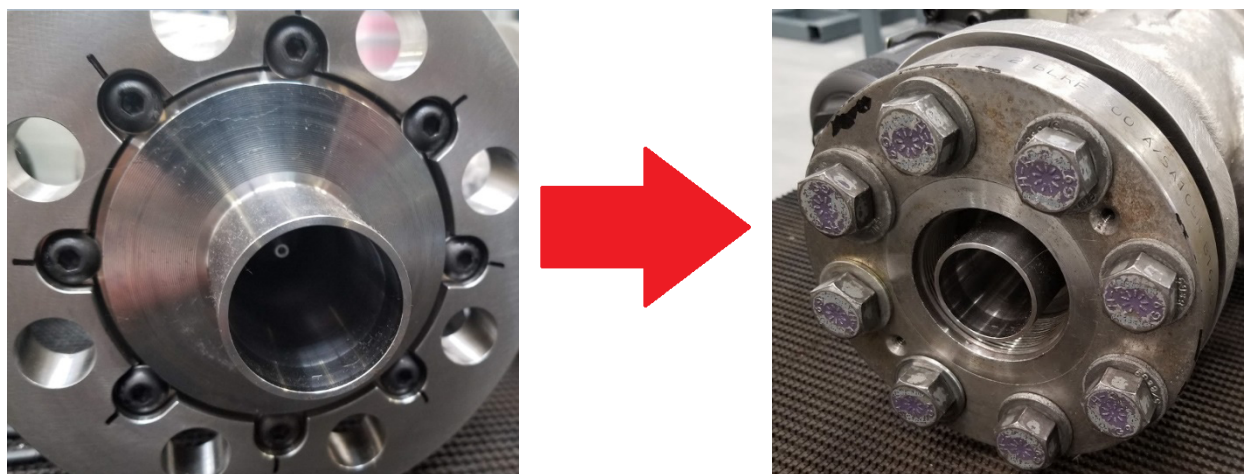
Illustration of Extension Style Diverging Sleeve
